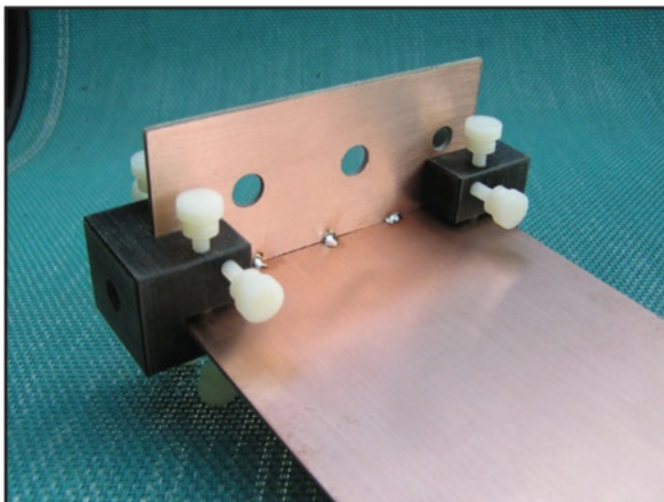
Photo C. A pair of SBSSs from QRPme hold this front panel in place while it's being soldered to the cabinet bottom.
